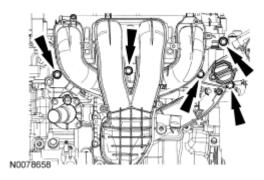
Locating Intake Manifold Bolts Courtesy of FORD MOTOR CO.
